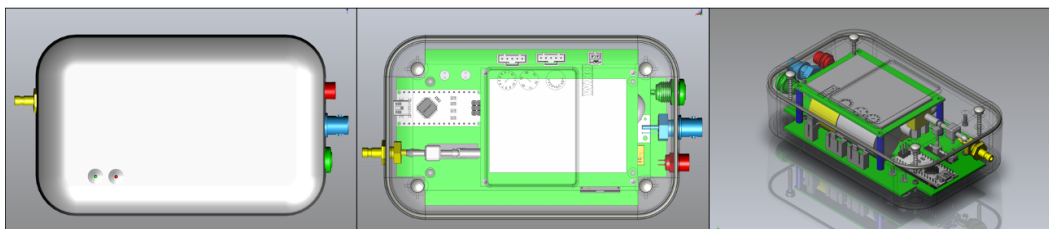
Figure shows the CAD rendering used to build the device. (Left) shows the device within its enclosure in its bottom view. (Middle) shows the bottom view of the device with transparent casing to show the layout of the inside components. (Right) shows an isometric view of the device with transparent casing.
